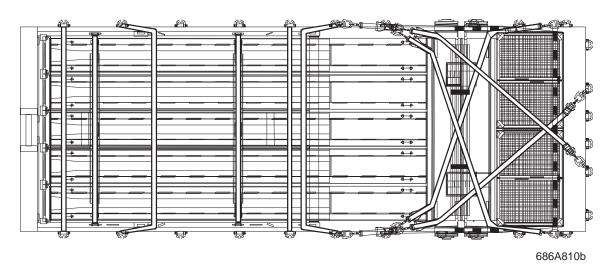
60 Flatrack Load T1 Top Lashing Arrangements
